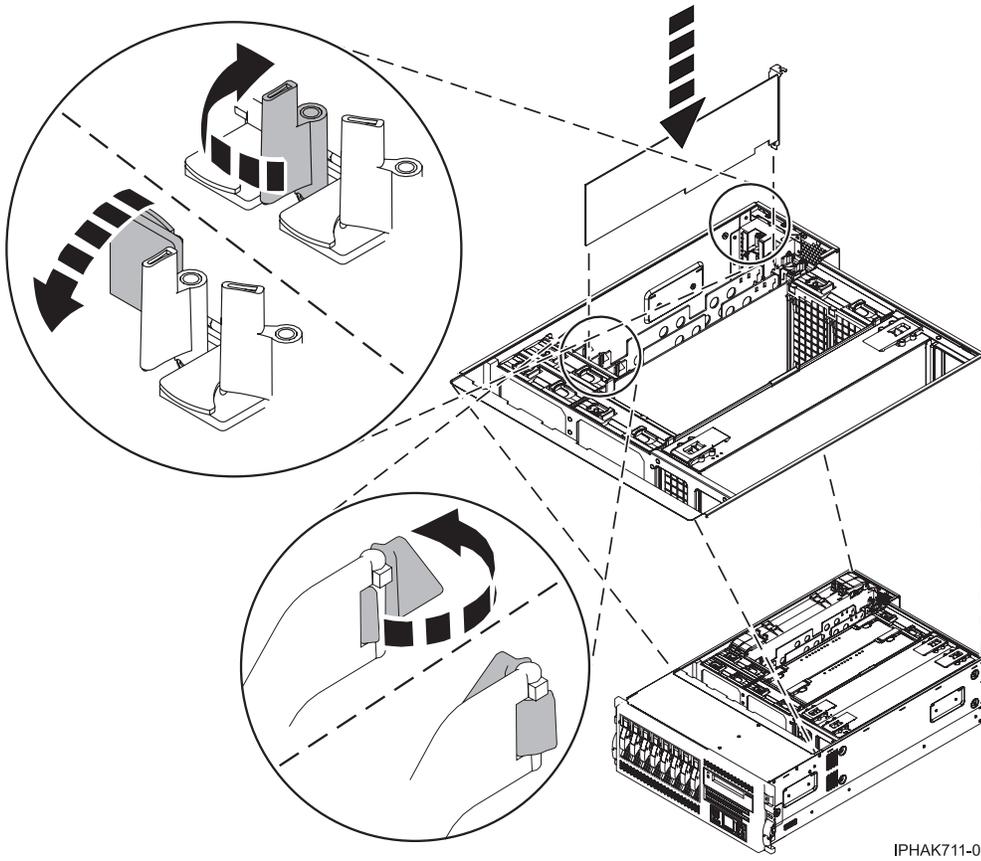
PCI adapter or filler plate removed from the rack-mounted unit
